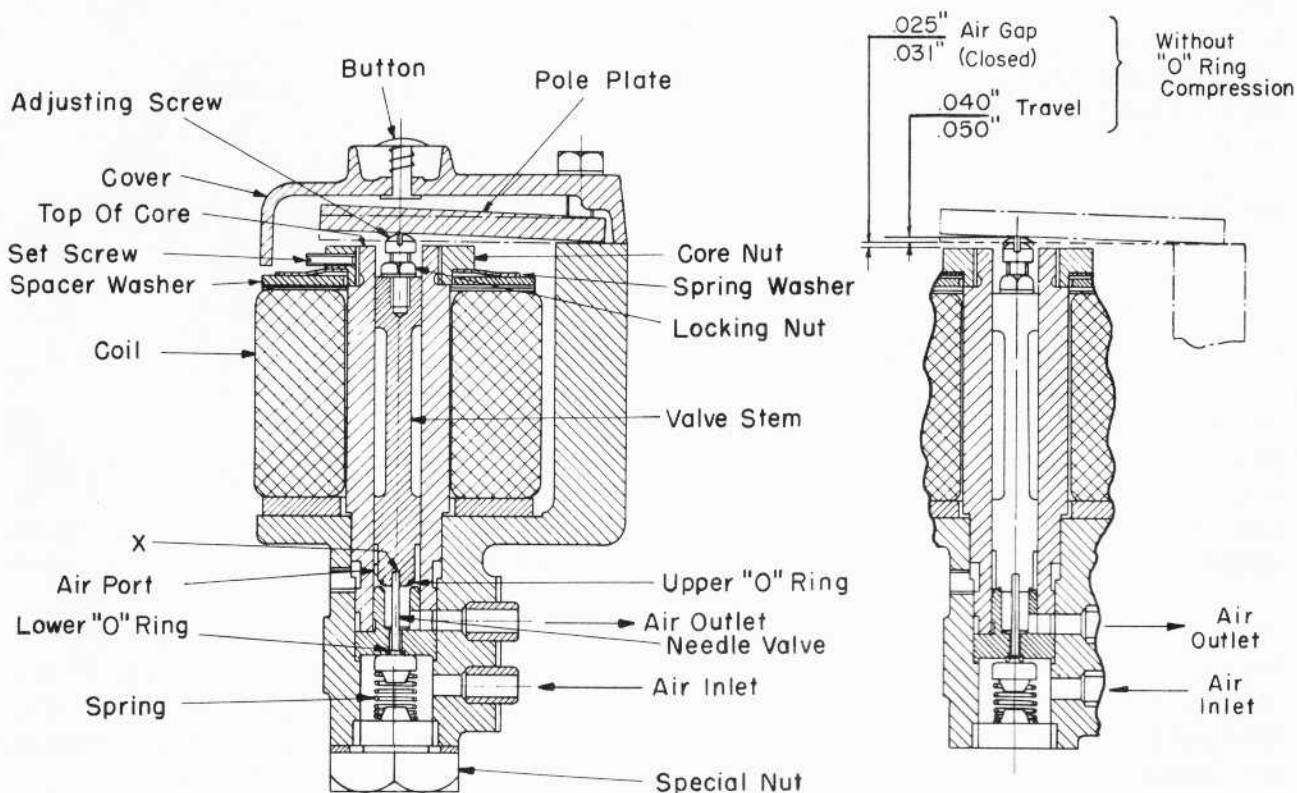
Cross-Section Of Magnet Valves 8178755 And 8211837
